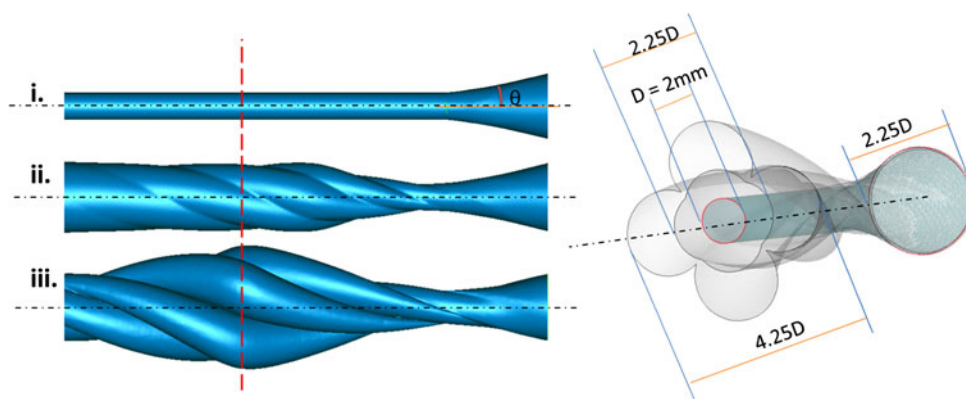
Left: Side profile views of three novel embodiments of 8FR cannula tips ending with a 7° diffuser cone tip. The two four-lobe swirl inducer design embodiments are depicted with differently sized lobe geometries. Right: The cross sectional shapes of the three cannula tip designs (arranged concentrically) depicted on the left have been demonstrated on the right in an isometric view clipped through the middle (i.e., at red-line on left).
